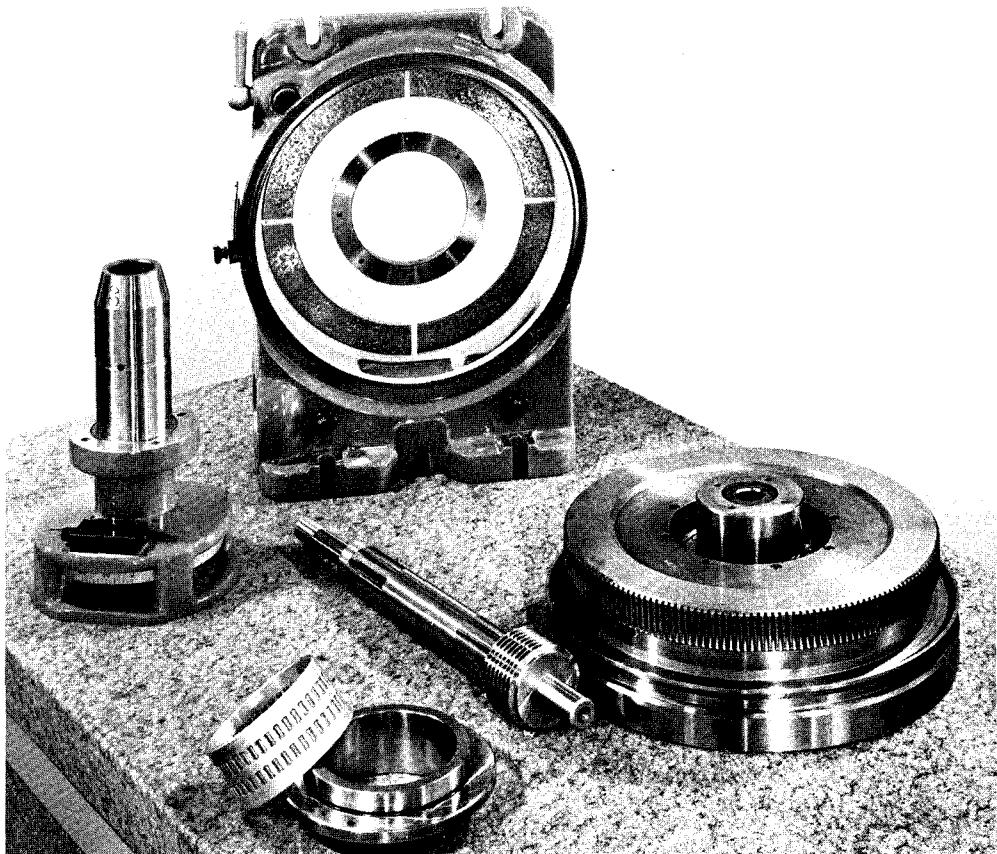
The accurate performance of a rotary table is made possible only by controlling the accuracy of all the mechanical parts which make up its assembly.
